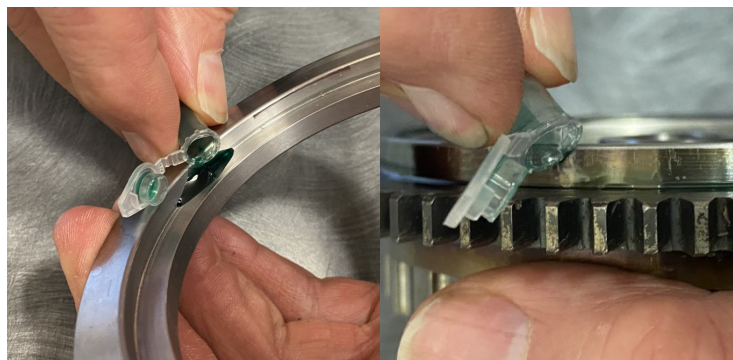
Apply Loctite 609 to front edge of rotor and to inside of weight ring.
